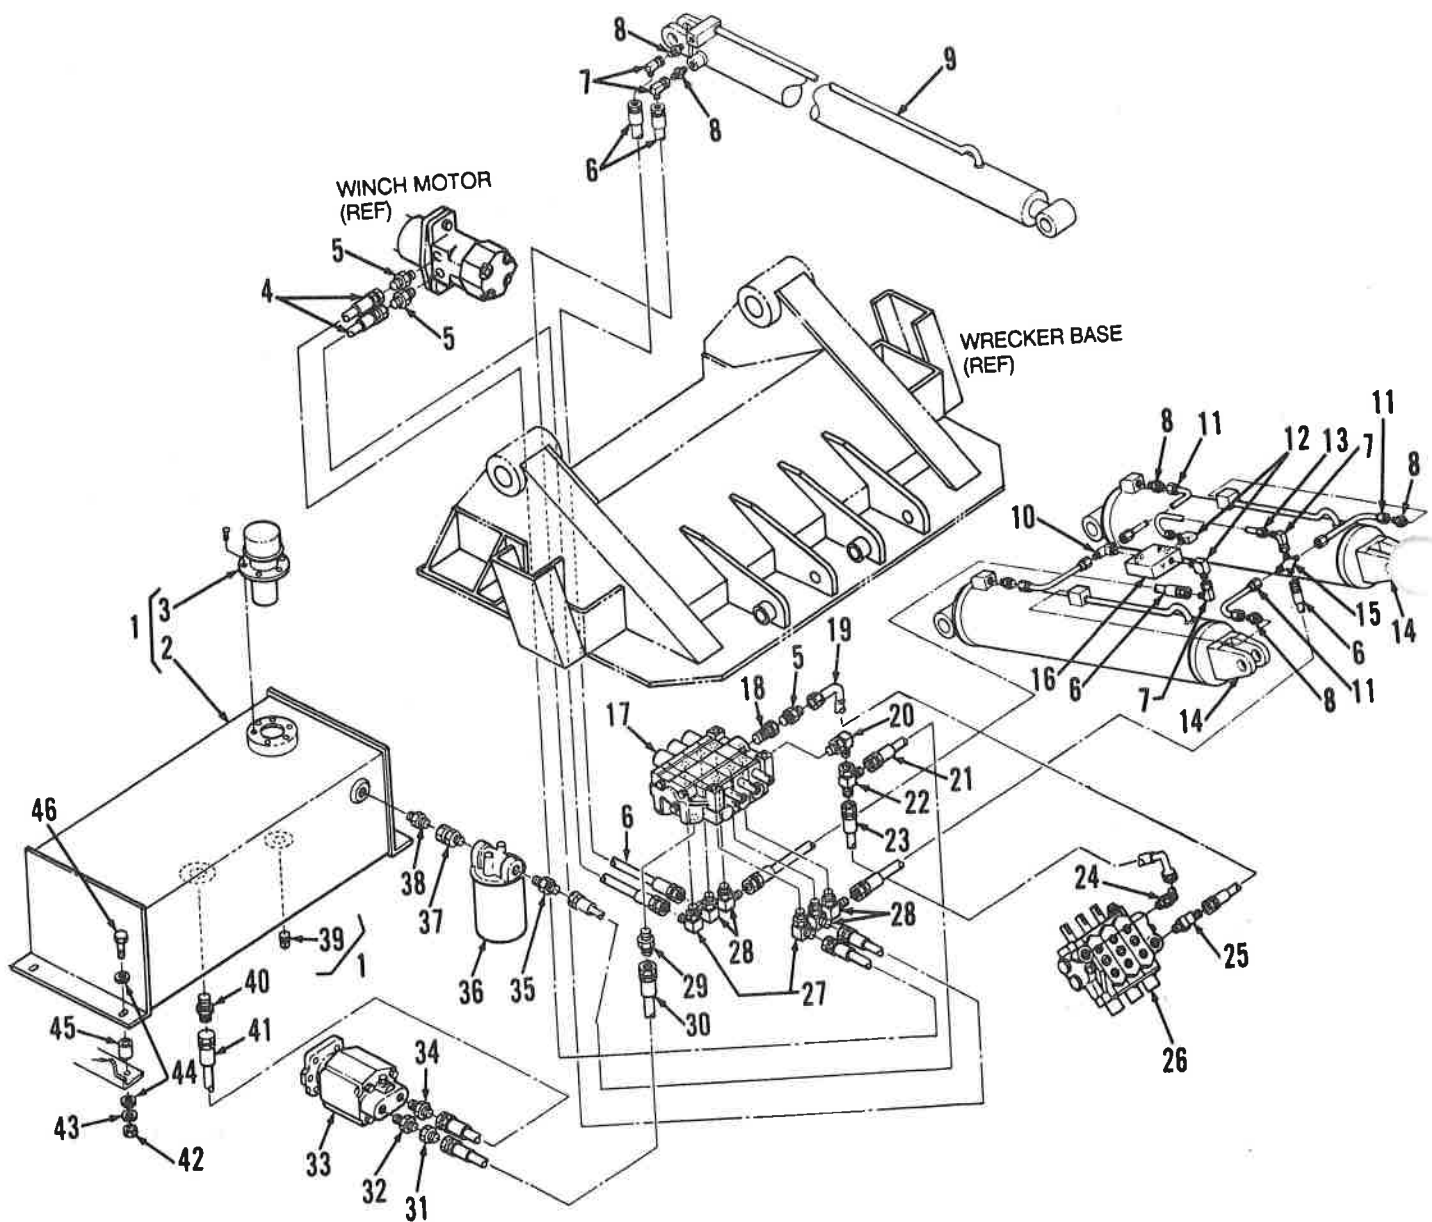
3105B Wrecker Hydraulic Parts with Related DFT 200 Wheel Lift Control Valve Hydraulic Components.
